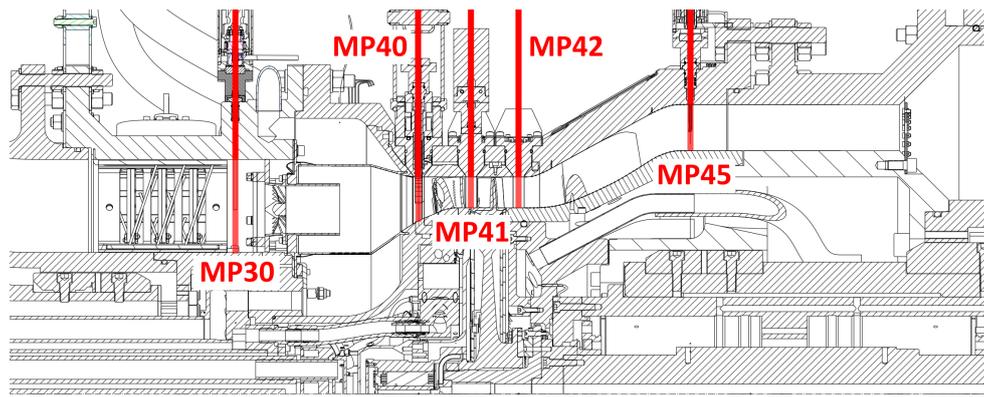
FACTOR rig CAD cut-away view, probe access MPs
